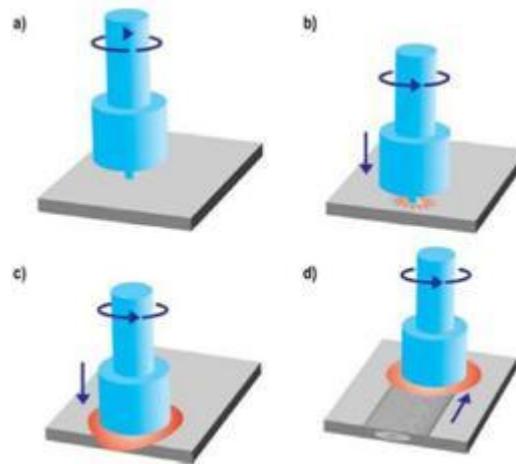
Schematic illustration of friction stir processing: a) rotating tool prior to contact with the plate; b) tool pin make contact with the plate, creating heat; c) shoulder makes contact, restricting further penetration while expanding the hot zone; d) plate moves relative to the rotating tool, creating a fully recrystallized, fine grain microstructure
